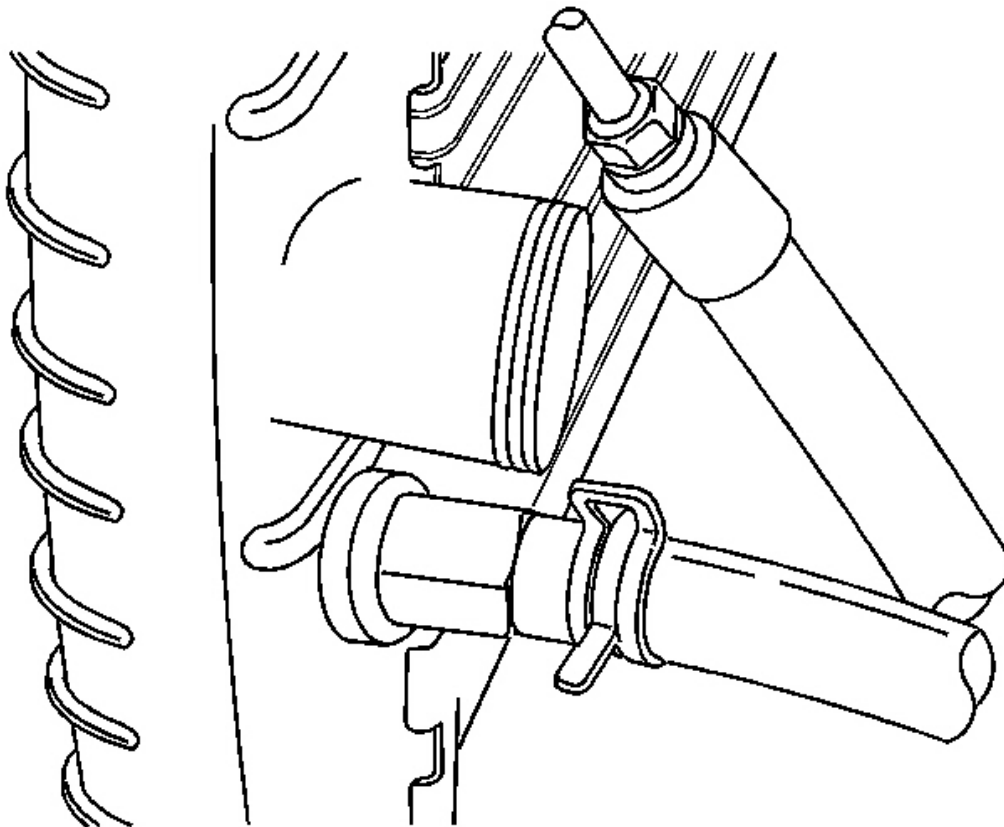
Radiator Threaded Connector & Fluid Cooler Hoses
